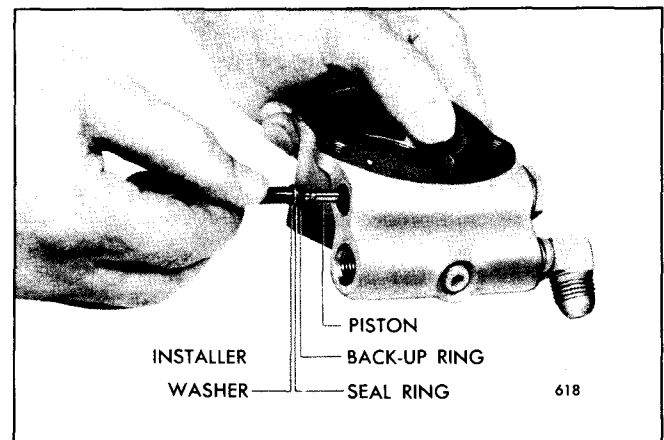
Installing Pressure Relief Piston, Back-Up Ring, Seal Ring and Washer in Pump Body with Installer J 7192
